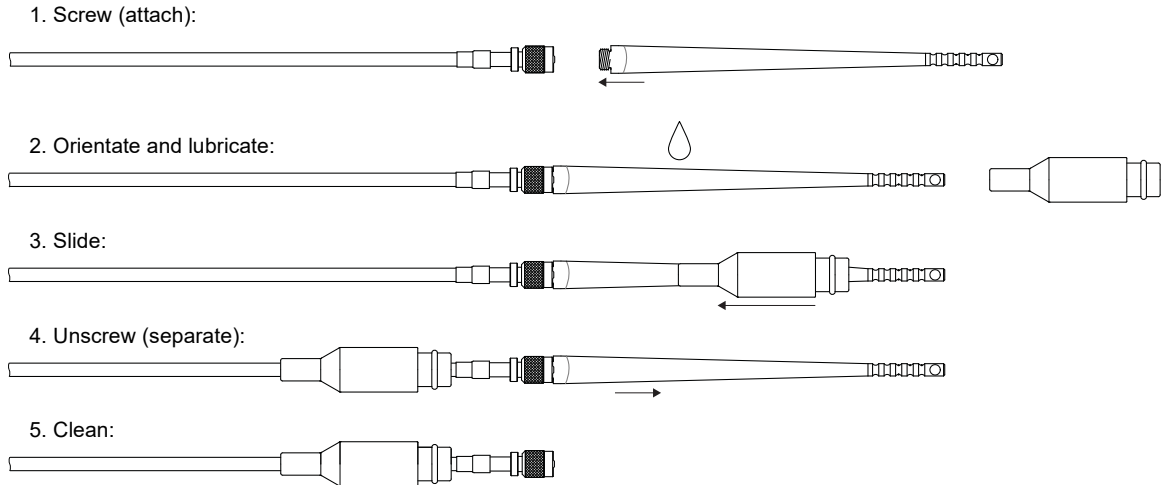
Assembling the male IP172 interconnection protector on a TQ9xx sensor's integral cable
